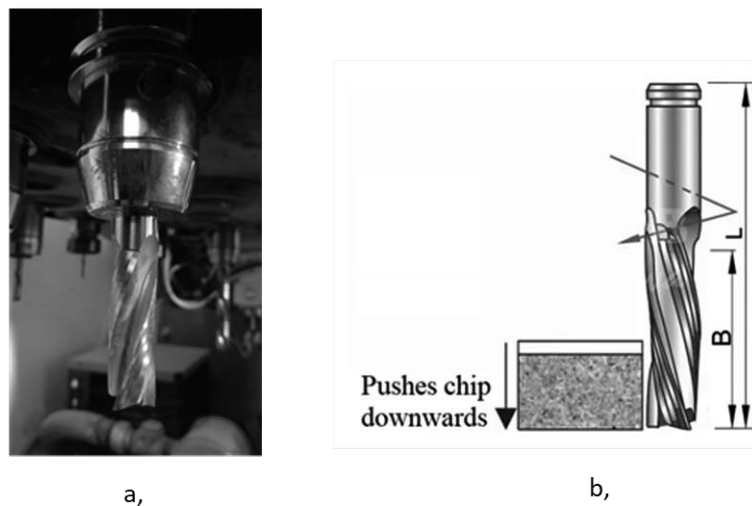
Finishing tool (a.); Diagram of the negative finishing cutter tool,  $B$  – tool working length,  $L$  – tool length (b,) (www.freudtools.com)
